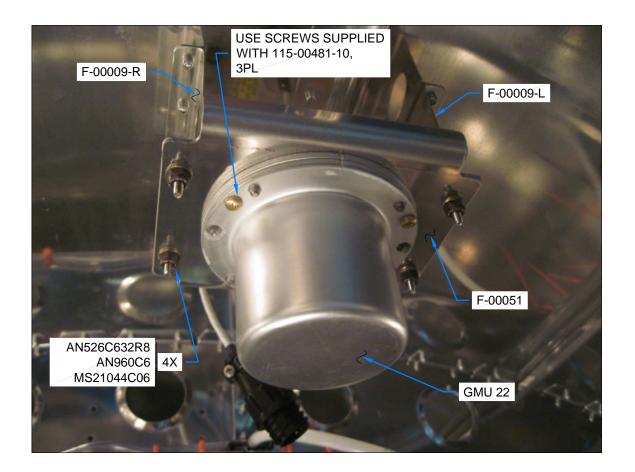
MOUNTING THE MAGNETOMETER ASSEMBLY
